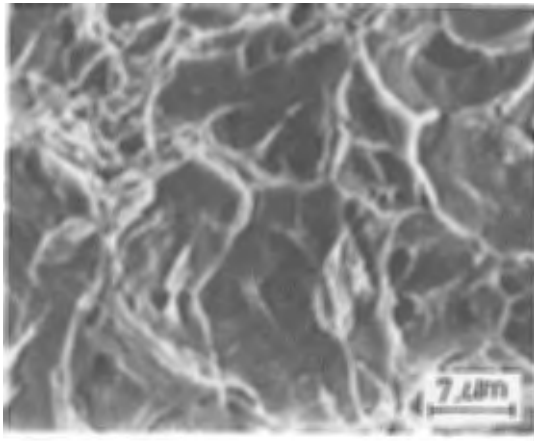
SEM fractograph showing dimple on the tensile fracture surface of bolt.
